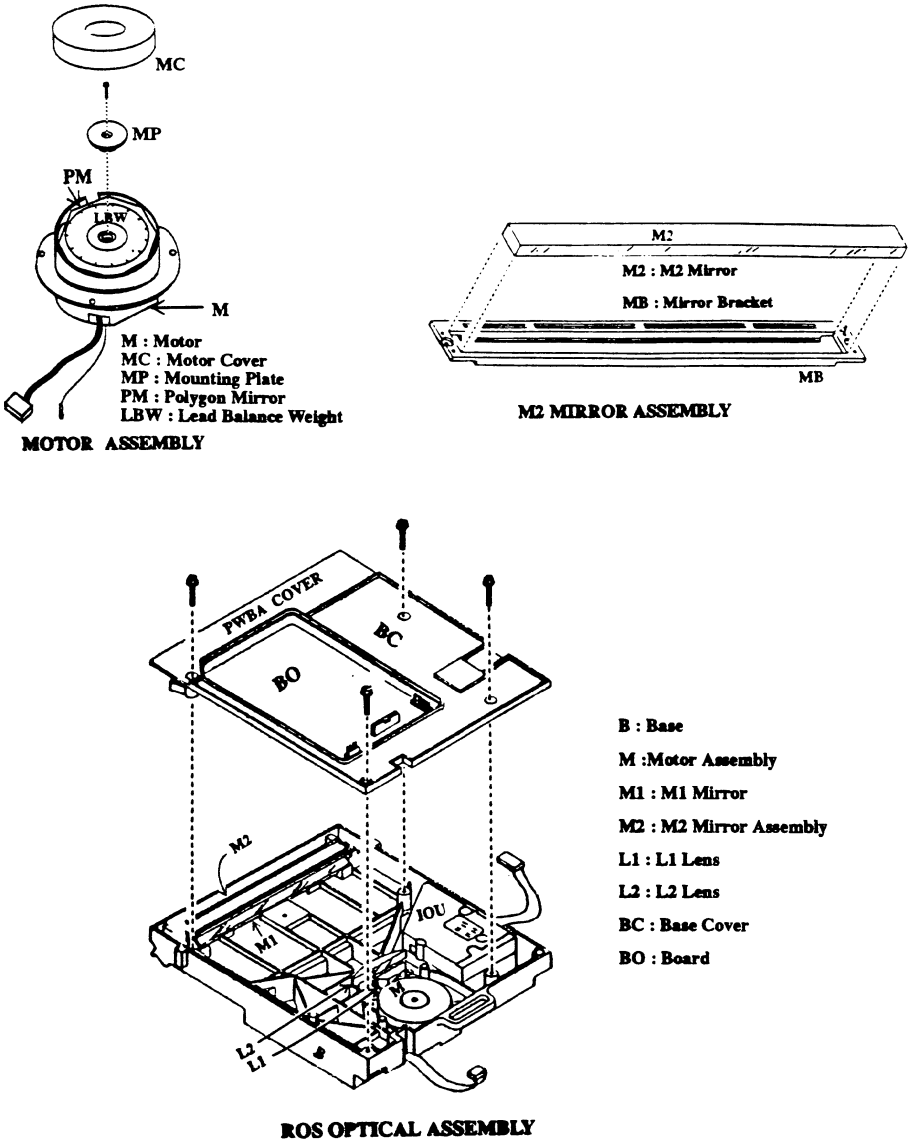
An Exploded View of the Raster Output Scanner (ROS) Optical Assembly (courtesy of Xerox, El Segundo)
